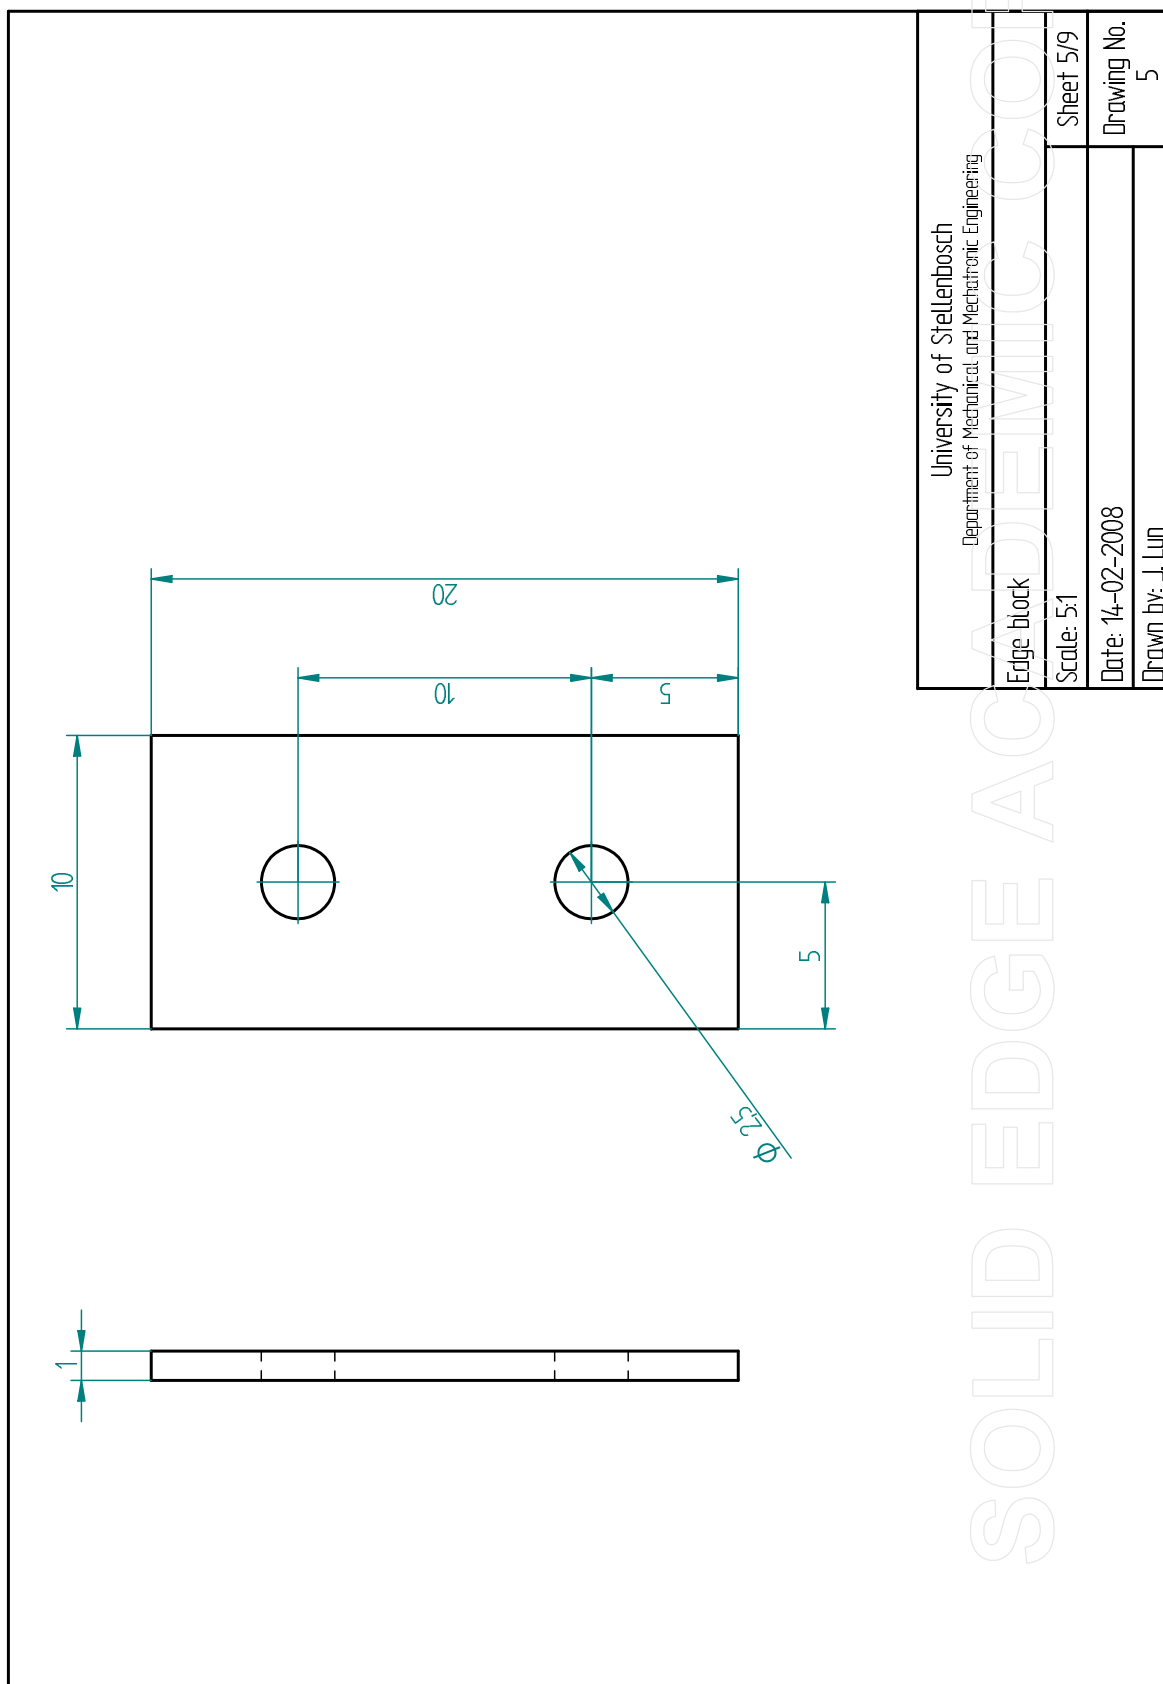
Design drawing of initial DTMS supporting edge blocks
